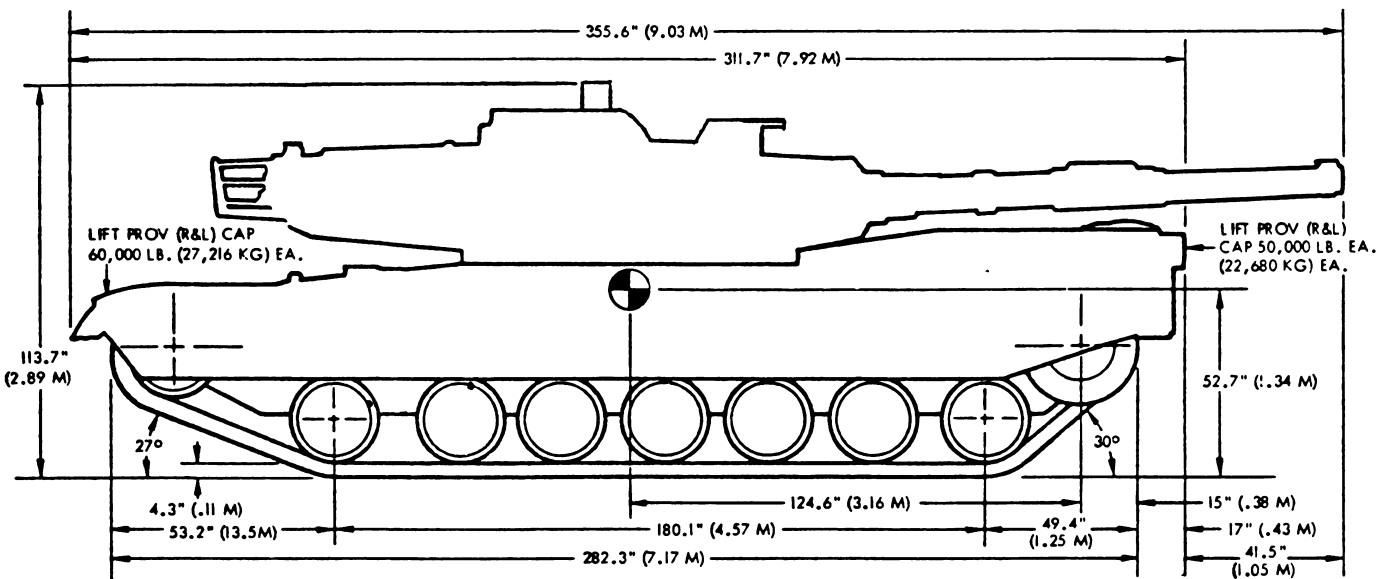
Transportability drawing, left-side elevation, M1E1 tank.
